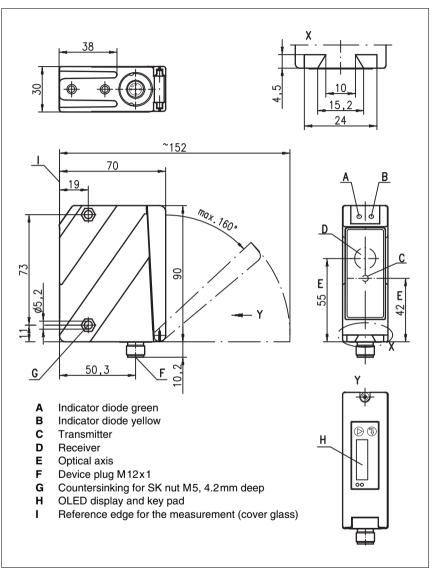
Dimensioned drawing ODS 96B..., ODSR 96B...
